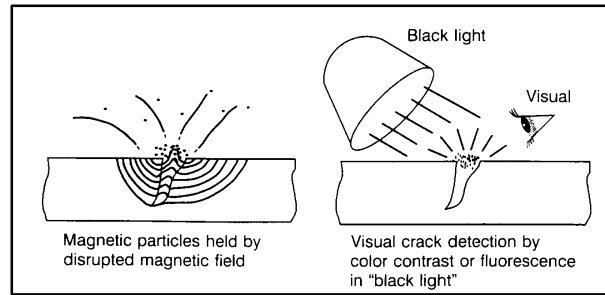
Crack detection by magnetic particle inspection.
